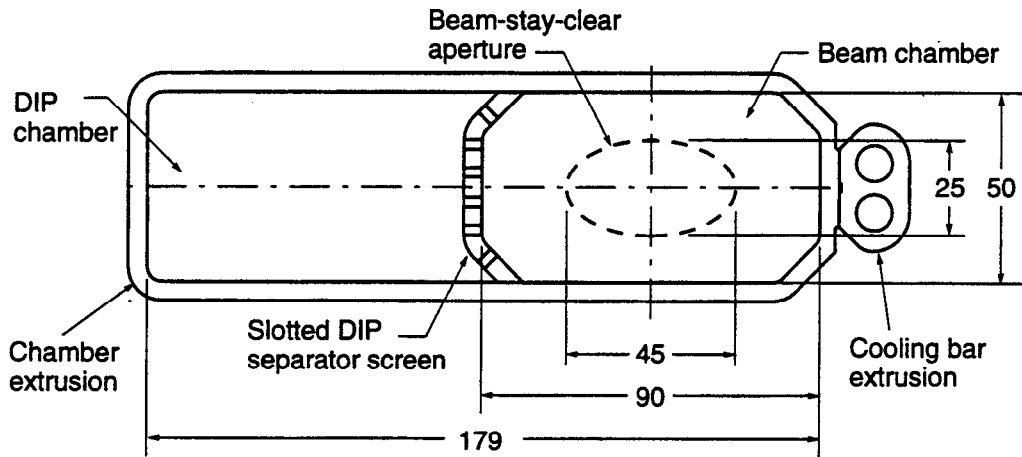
HER vacuum chamber cross section at a dipole; dimensions are in millimeters.
